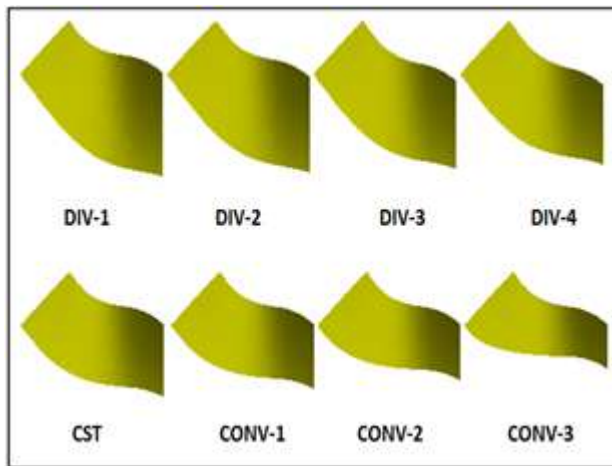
Blade geometrical shape views for different hub and shroud exit diameters
